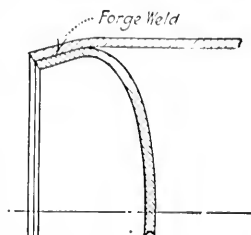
CONSTRUCTION OF FORGE-WELDED HEAD
